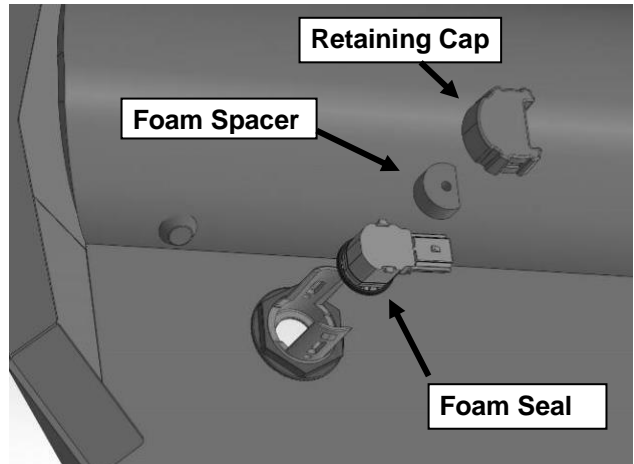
Models without sensors: insert sensor plugs into the sensor hole
